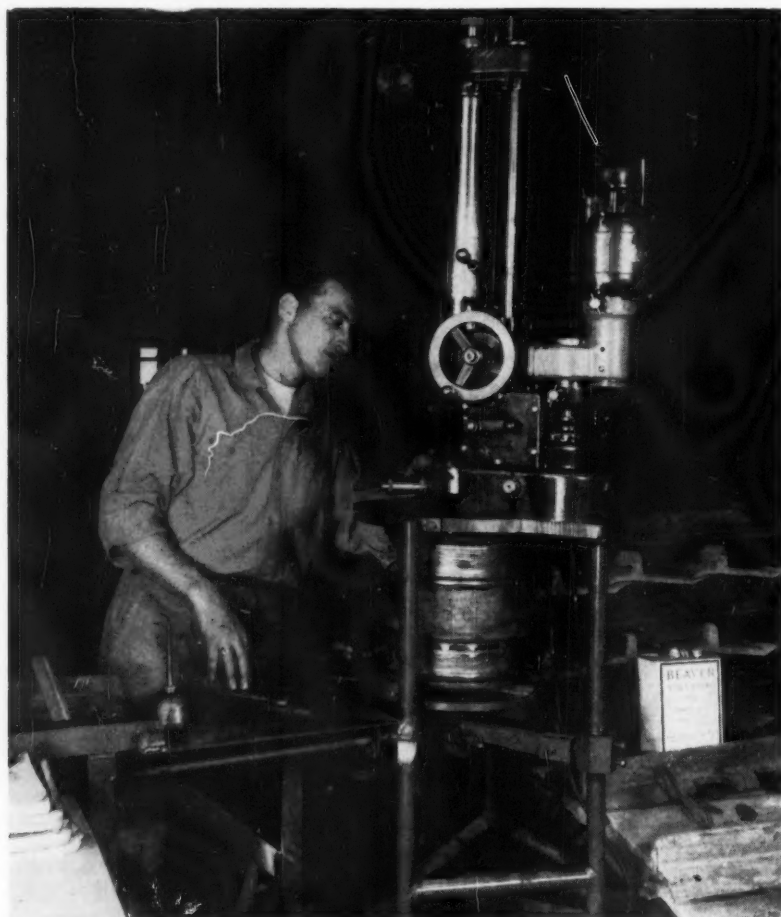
After the rollers are rebuilt, the inside diameter is bored to size. This is the only finishing operation required on the rollers. The surfaces are smooth enough to be used in the as-welded condition.
